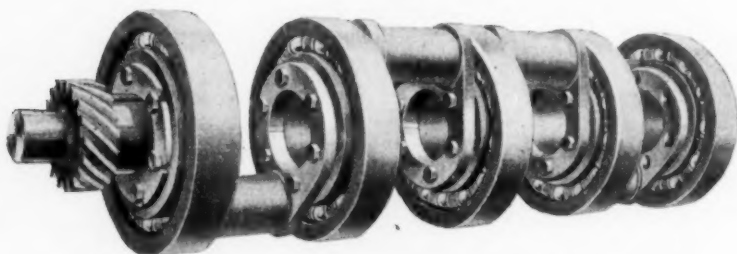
BALL BEARING CRANKSHAFT OF MOORE 40 H.P. CAR
